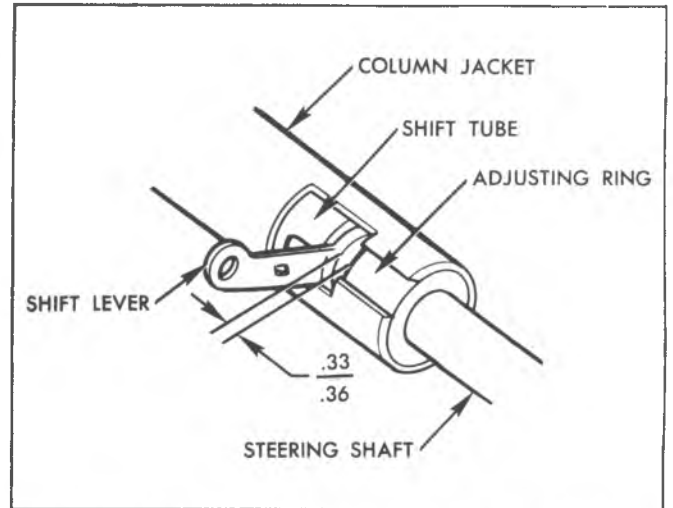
B4-20--Shift Tube Adjustment-Automatic Transmission
